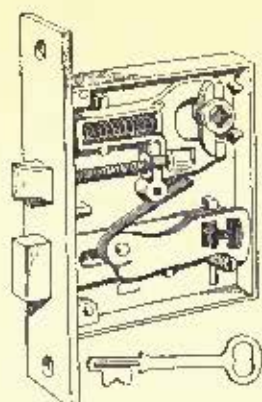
Three-Lever Lock. Hopkins & Dickinson Mfg. Co.
